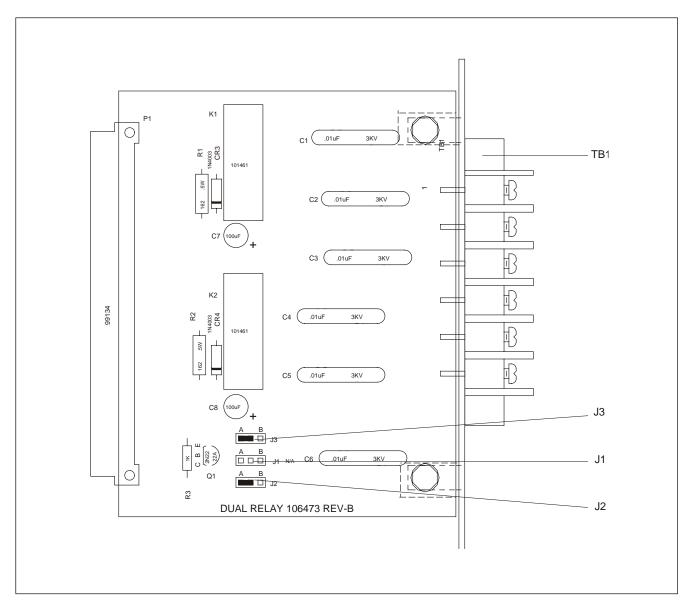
Controls and indicators, and component locator drawing, Dual Relay I/O module
